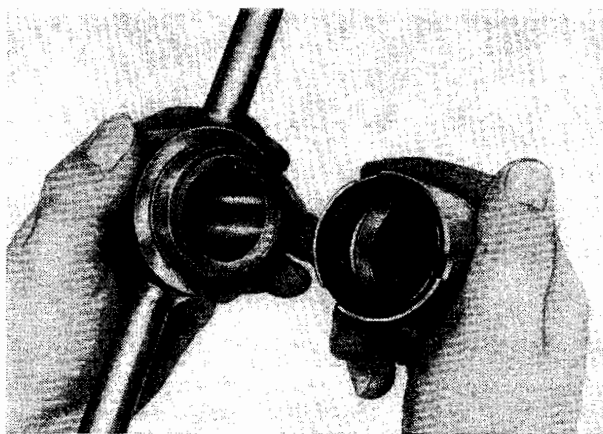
Combined assembling spanner for driving the packing ring into the threaded ring
